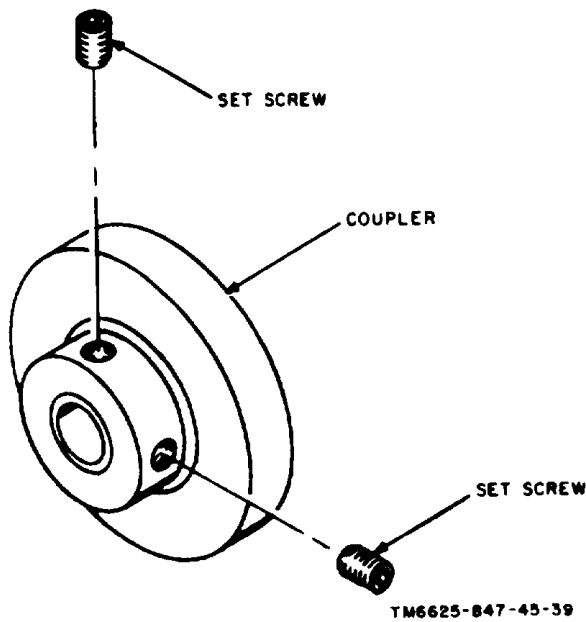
Common module tray A1A1, gear drive assembly coupe.
